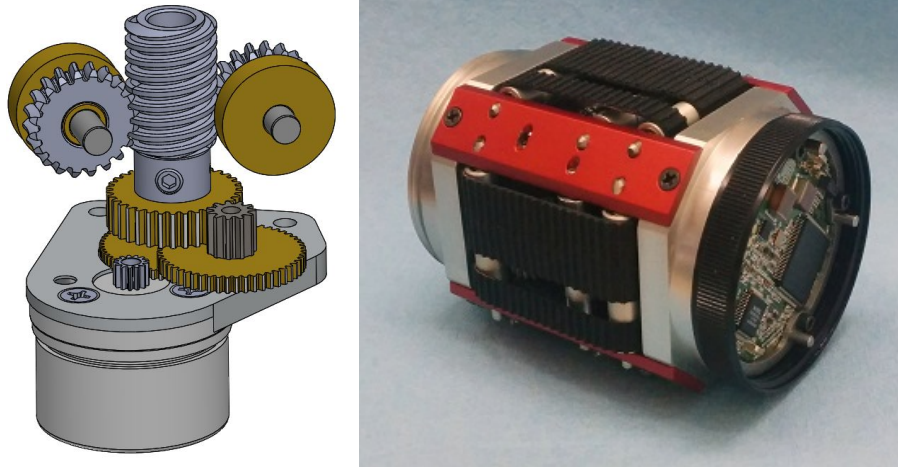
The worm gear used in the Tread Module (left) and the full Tread Module with four orthogonal outputs driven by one motor and a combination transmission of parallel axis gears, skew axis gears, and belt drives (right).
